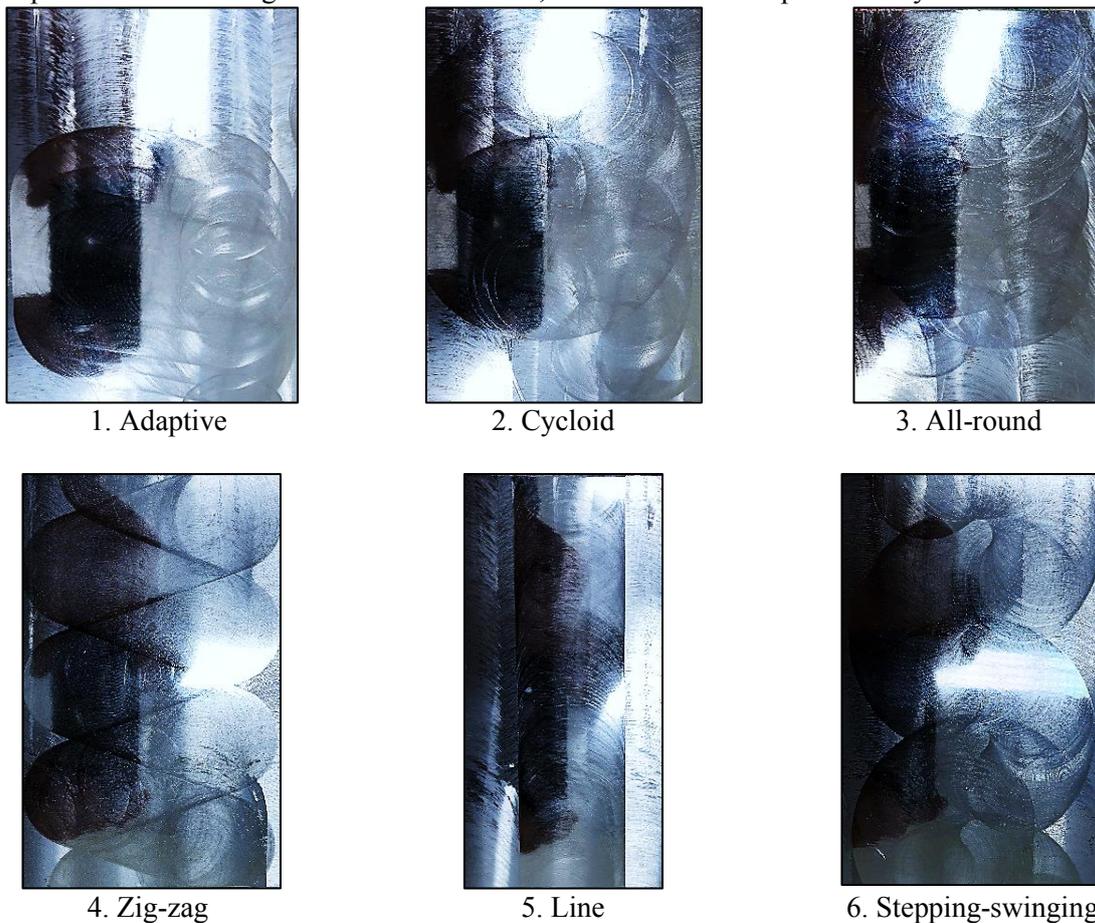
The surfaces of the burnished workpieces produced by six different strategies
